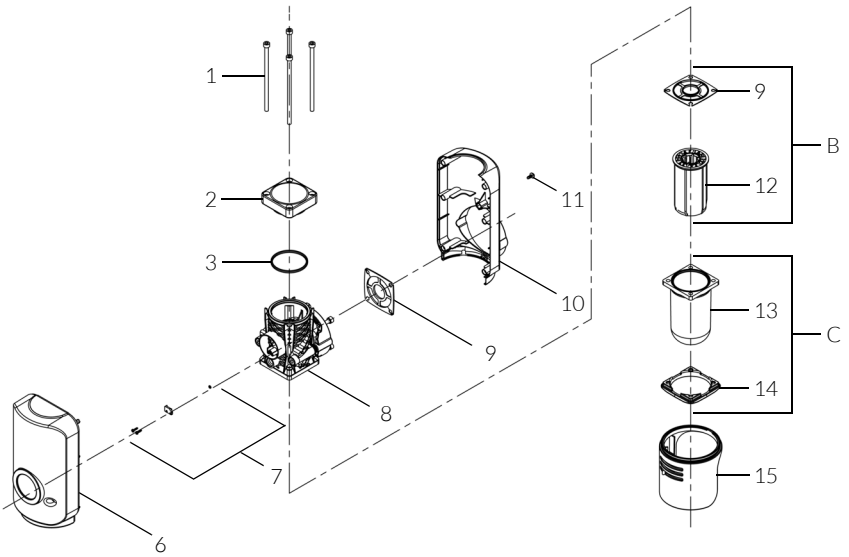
Spare parts CLEAR 2.0 K 3/4" - 1 1/4"
